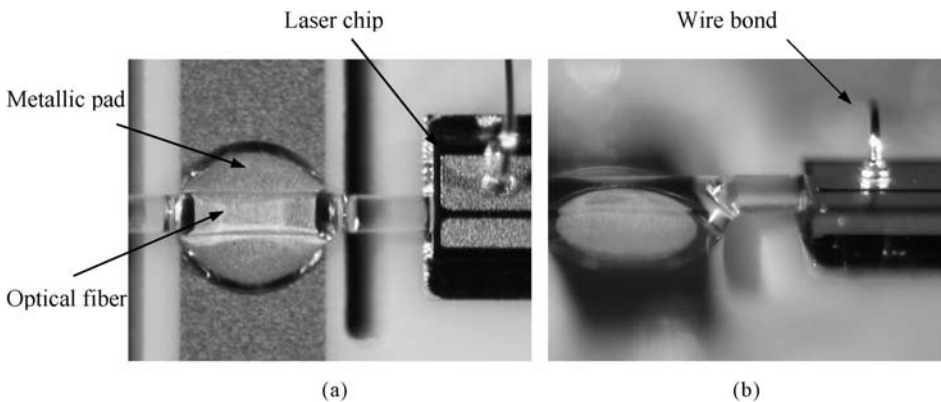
(a) Top view of the laser-to-fiber assembly. (b) Side-view of the laser-to-fiber assembly. The fiber is embedded in the adhesive dot owing to a planar assembly design.
